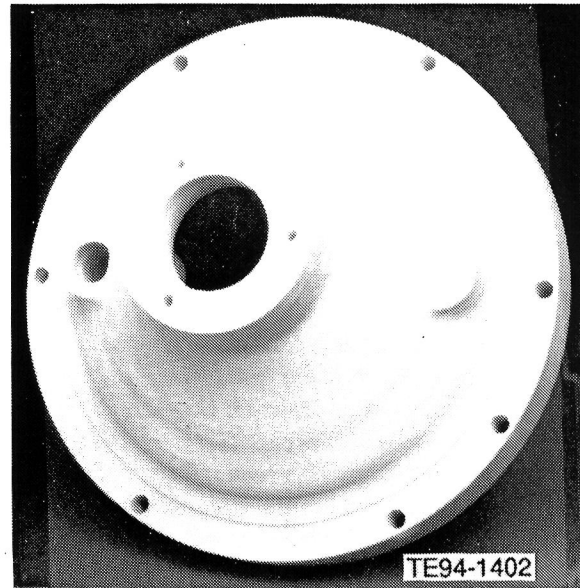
Gasifier housing insulation mandrel polycarbonate prototype (aft surface).
